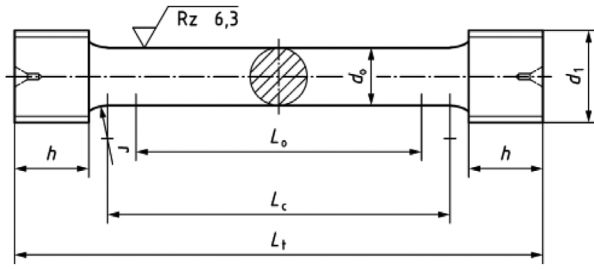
Tensile specimen form B: round specimen with threaded heads [12]
